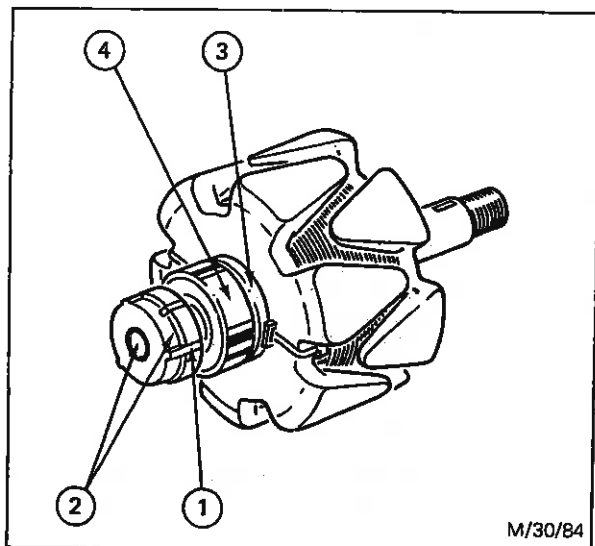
Slip Rings and Bearing Renewal - 17ACR'M' Alternator
